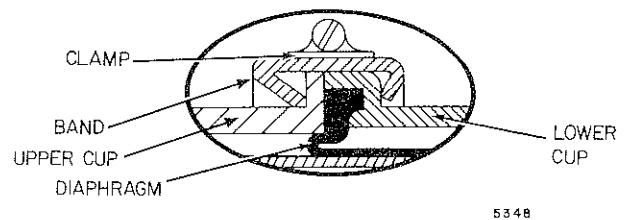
Operator Body Assembly, MP904A Series 2 and 3; and MP904B Series 2.
